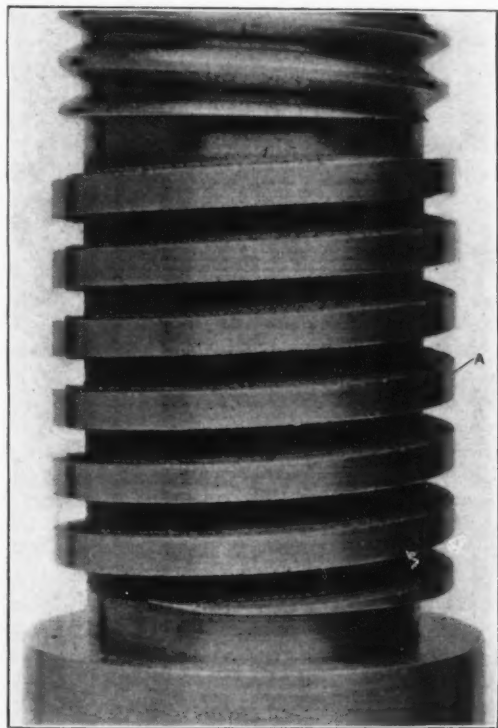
A Detail of the Square Thread A of Fig. 2, Showing the Rough and Partly Finished Cuts.
